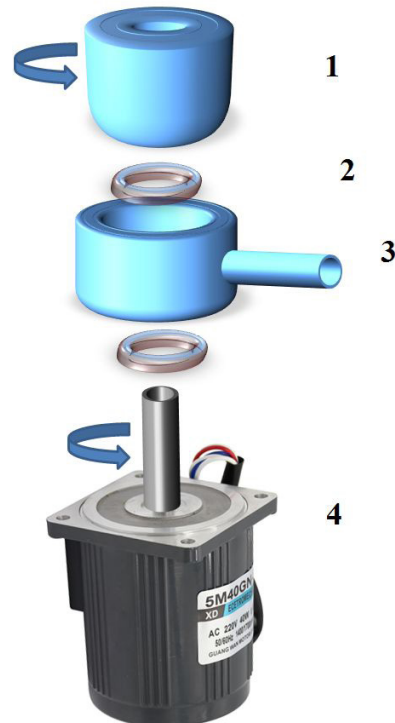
3D design of fabricated spin coater (1) substrate holder, (2) O ring, (3) vacuum channel and (4) motor.
